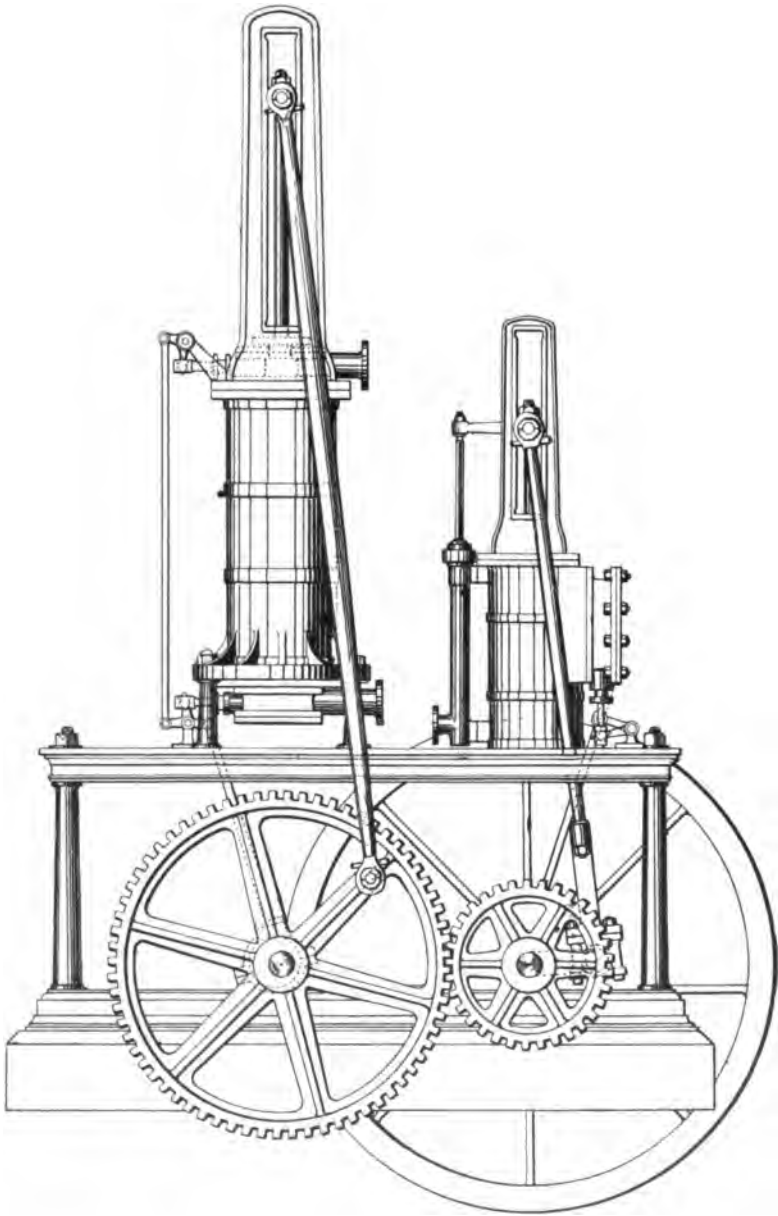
HARRISON'S ETHER MACHINE—TABLE PATTERN. 1859.
